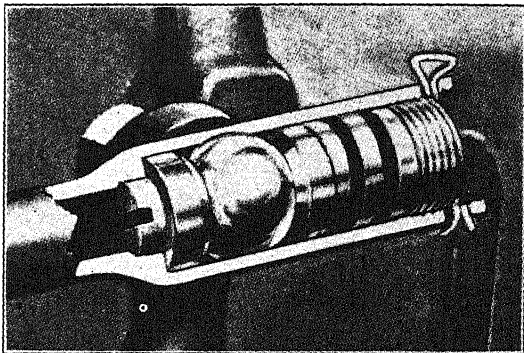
Ball-and-socket connection between guide arm and drag link.
